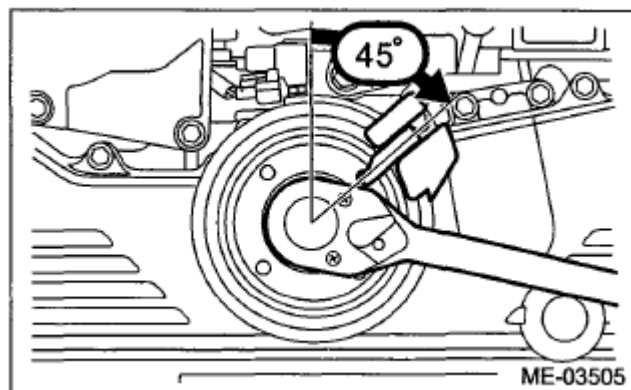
Turning Crank Pulley Clockwise Until Belt Guide Comes To Approximately 45°
